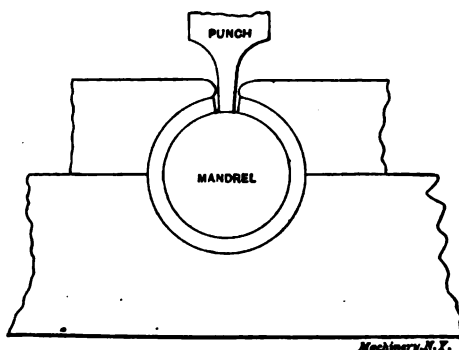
Forming a Bow Spring with Ends which nearly meet.
